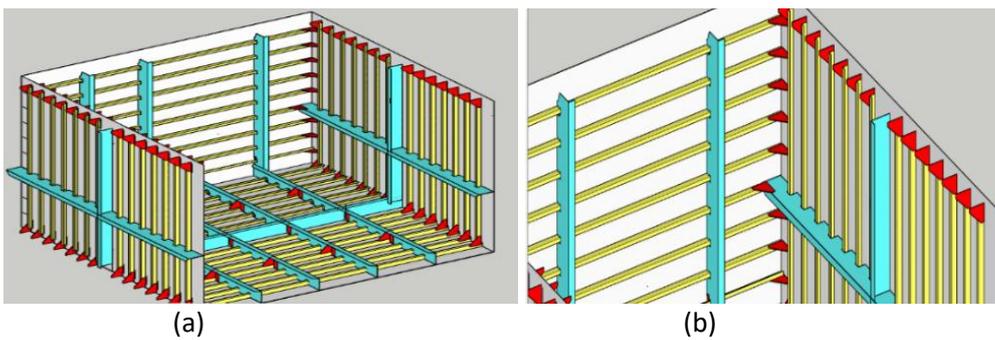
Erection (a) Longitudinal bulkhead frame 21-26 portside, and (b) Bracket corner
